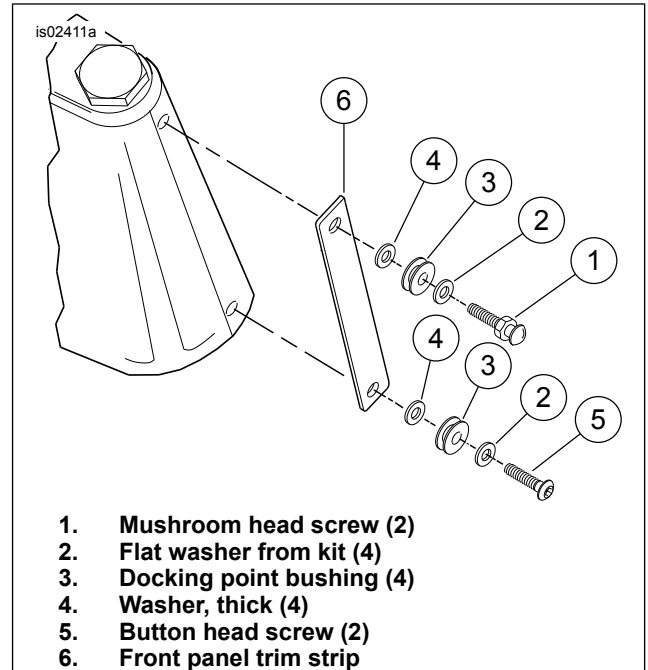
Front Panel Trim Strip and Windshield Dock Installation
